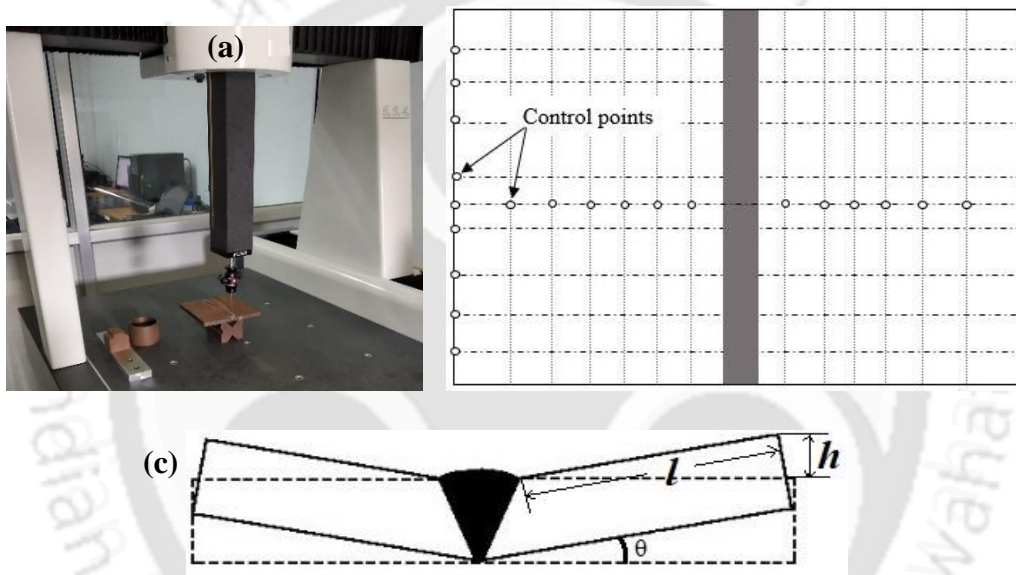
(a) CMM set up, (b) Control points for measurement, (c) Angular distortion angle (θ)
